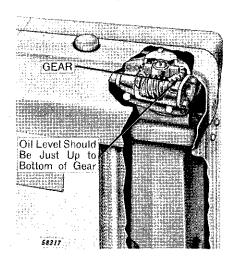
Steering Gear Oil Level (Manual Steering)
